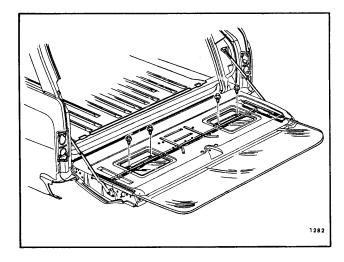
Tail Gate Inner Panel Cam Attachments
